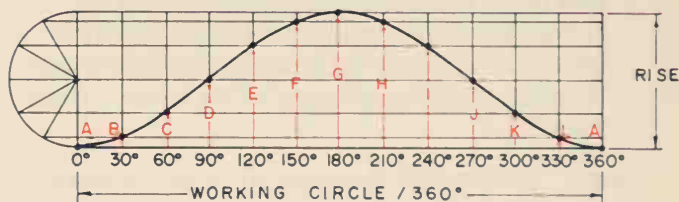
A Drawing a cam with an offset follower design layout - Step 1
